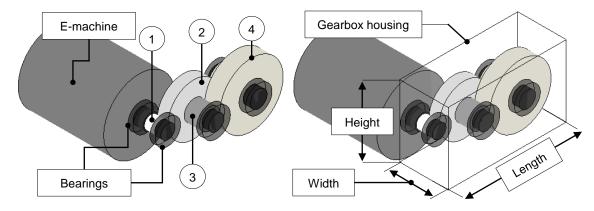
Calculated shaft, bearing, and wheels (left-hand side) and resulting housing dimensions (right-hand side) for a simulated Layout A gearbox
